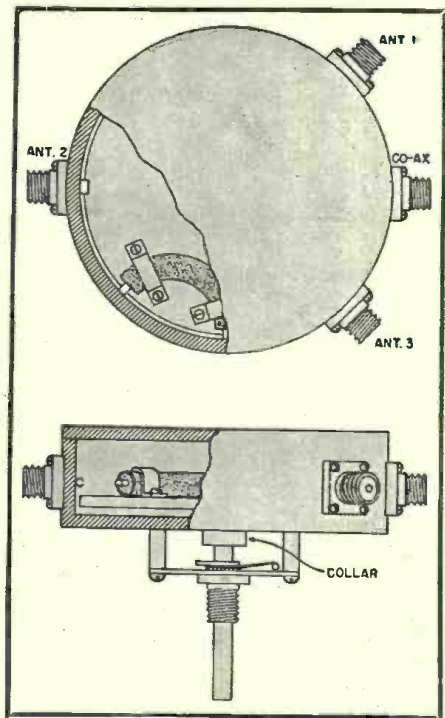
Cutaway view of the completed switch, showing method of assembly.
